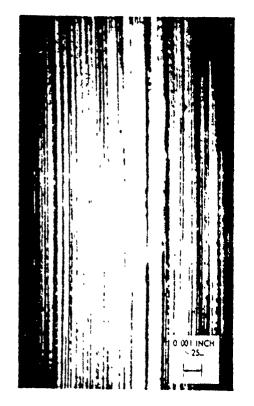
R4 bearing outer-race groove after 10,000 hours of successful operation at 24,000 rpm
